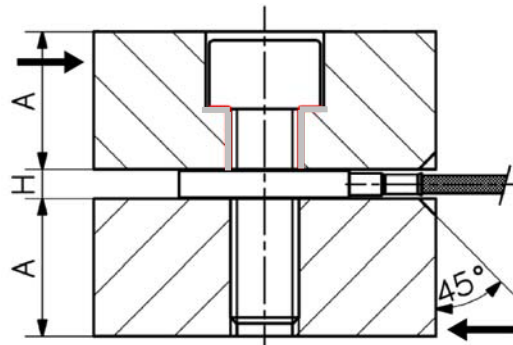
SlimLine force sensor with preloading bolt (greased surfaces and thread shown in gray).
